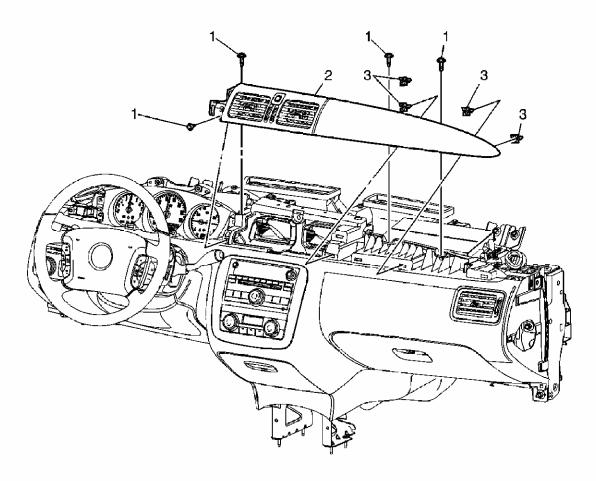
Removing/Installing Instrument Panel Trim Plat Courtesy of GENERAL MOTORS CORP.
